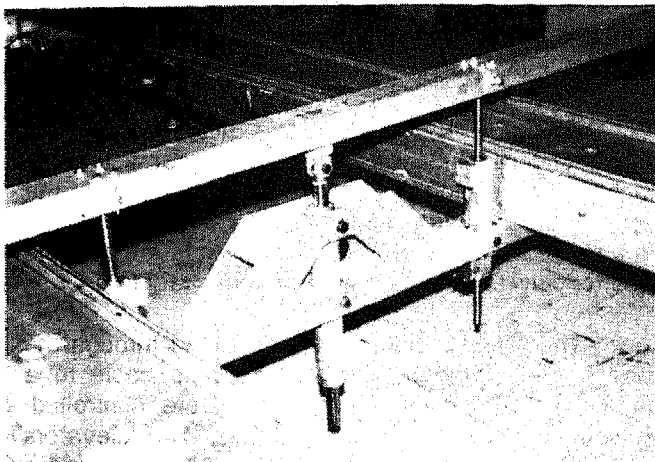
Ride/Roll crossmember mounted below Frame, with servo cylinders
